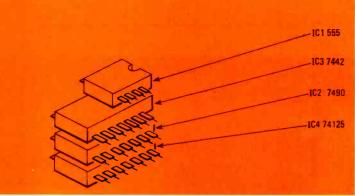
DETAILS OF IC BRICKLAYING arrangement. The CMOS head is not shown here.
